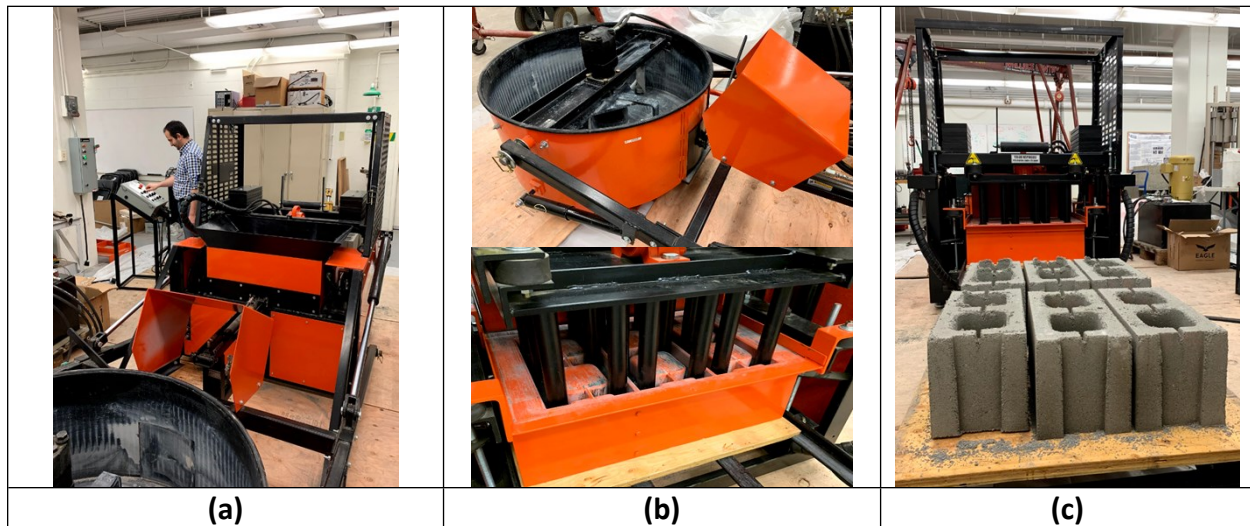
Photographs of the block-making machine system used for the production of prototype concrete masonry units, including (a) a view of the block-making machine and control panel, (b) a view of the pan-style mixer and mold press setup, and (c) a view of the product offload track after extracting freshly produced concrete masonry units.
